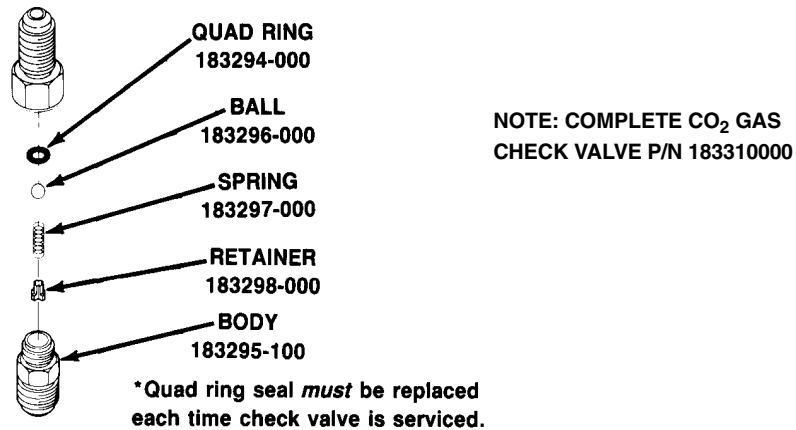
CO<sub>2</sub> GAS CHECK VALVE ASSEMBLY
